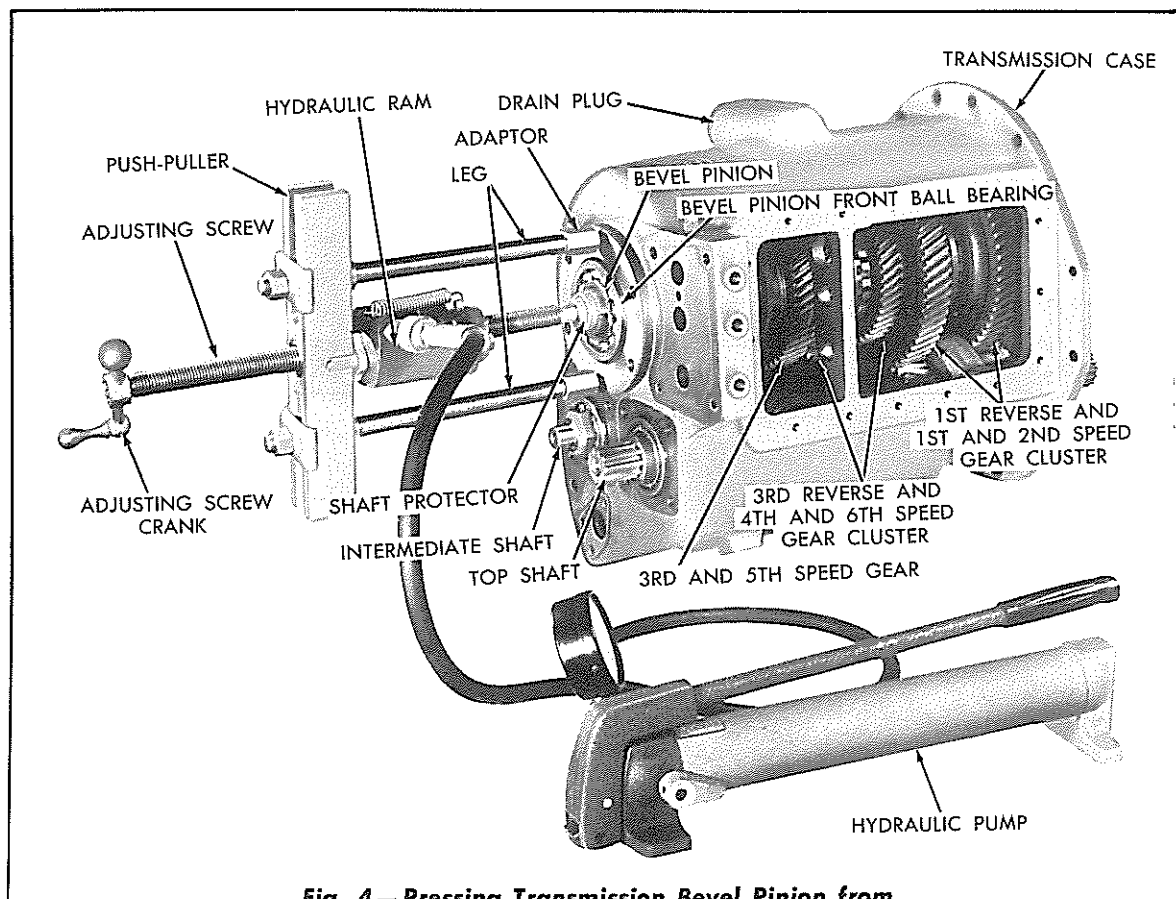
Pressing Transmission Bevel Pinion from Front Ball Bearing
